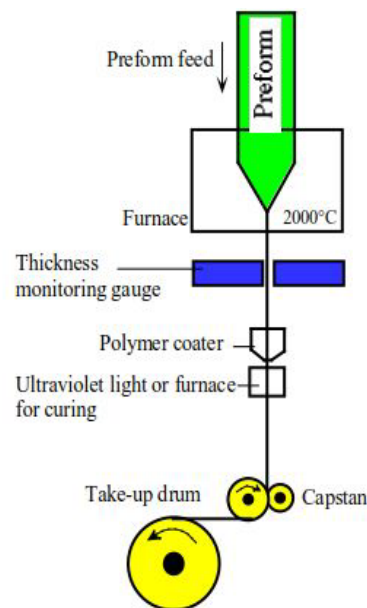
Scheme of the fiber drawing process [Ka, 99].
